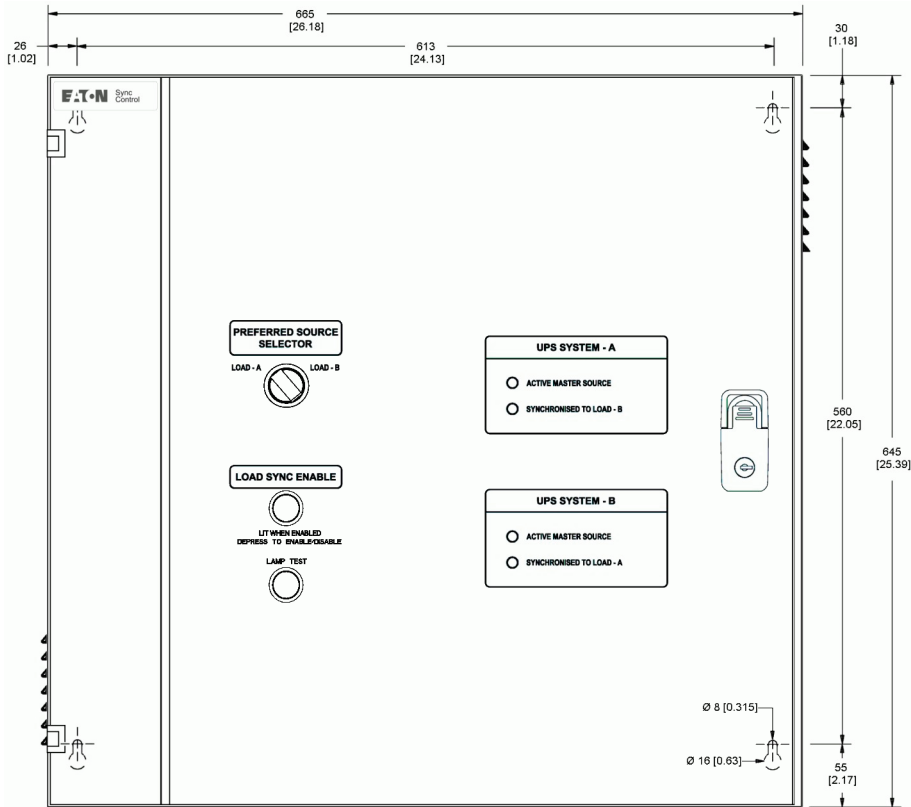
Eaton Sync Control dimensions, front view – Dimensions are in millimetres [inches]
